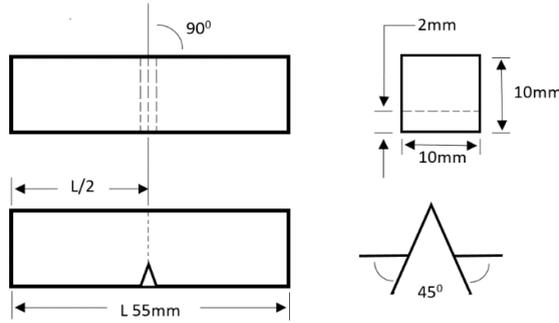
Impact test specimen with Standard ASTM E23.[15]
